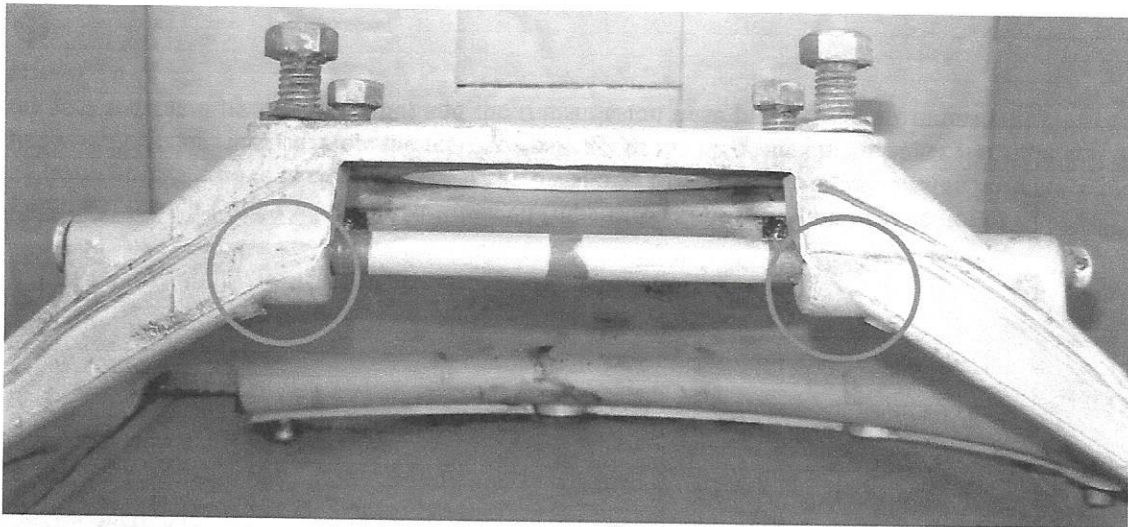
Unaltered Flywheel Housing (not the one installed on the following photos) Note appearance of unaltered flywheel housing; the red-circled areas are where material was removed on the installed housing.
